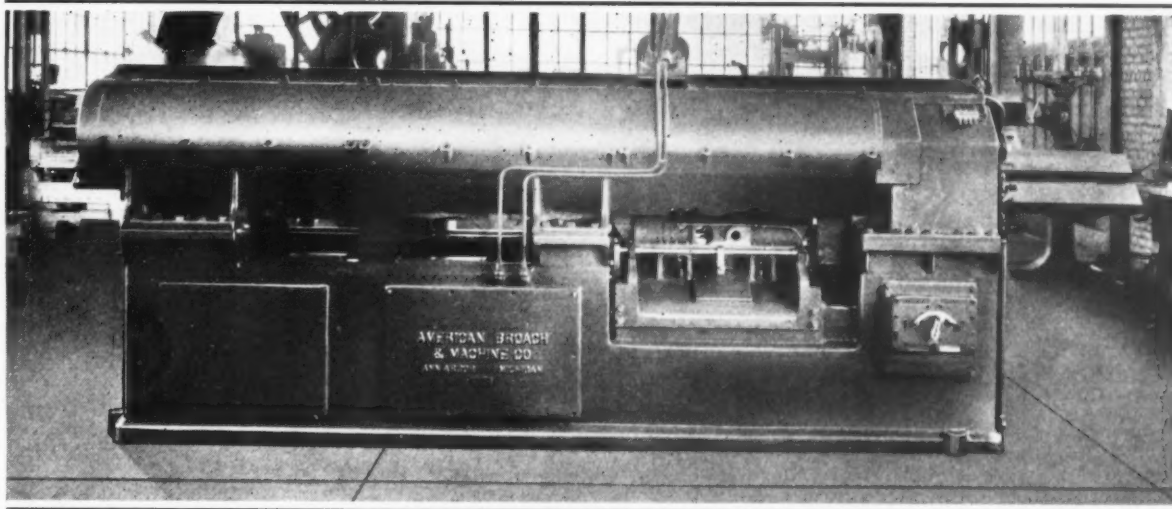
Machine Designed for Automatically Broaching Locating Surfaces on V-8 Cylinder Blocks
